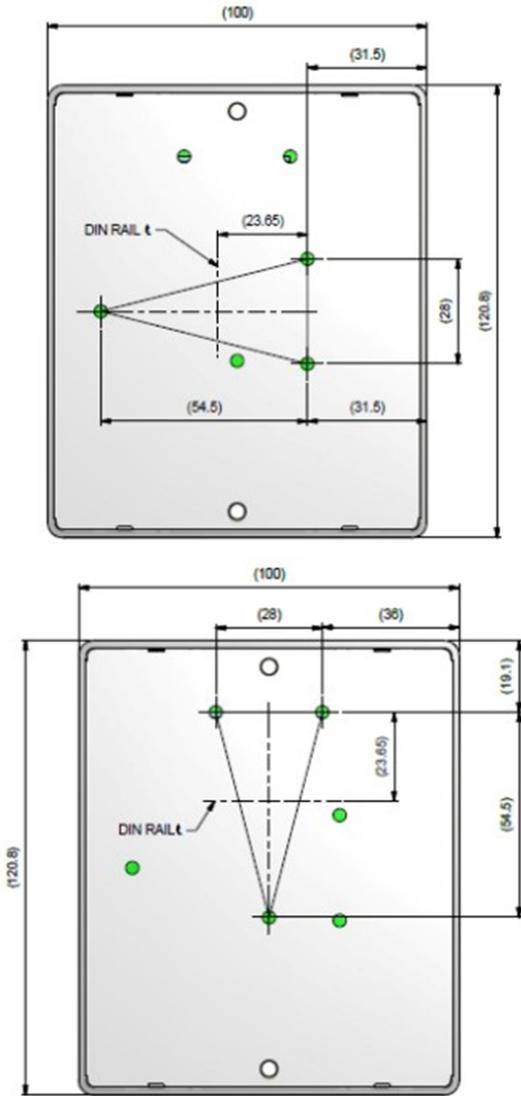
DIN Rail Mounting Dimensions (horizontal and vertical screw-hole selection)
